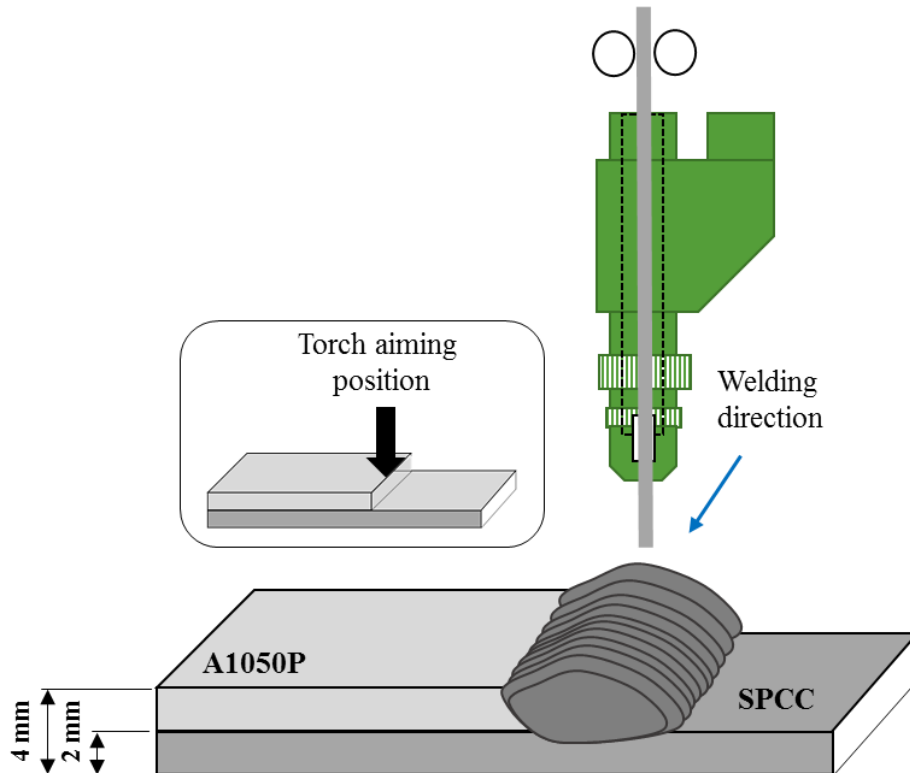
Experiment set-up for dissimilar Al/Steel lapse joining
